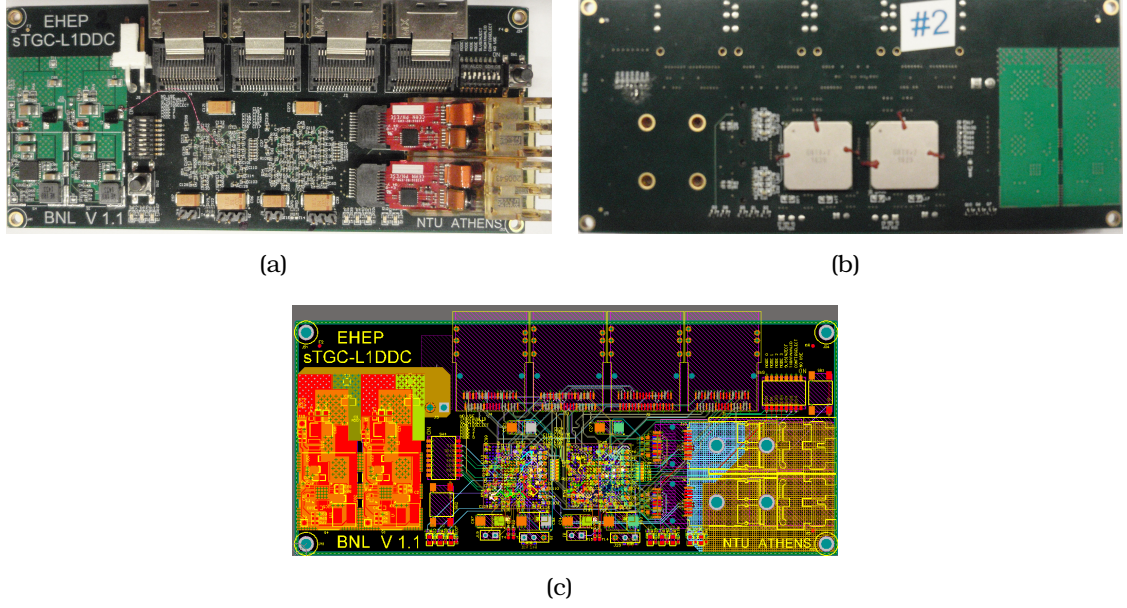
sTGC-L1DDC Prototype-2.*(a) Top side, (b) bottom side and (c) layout.
